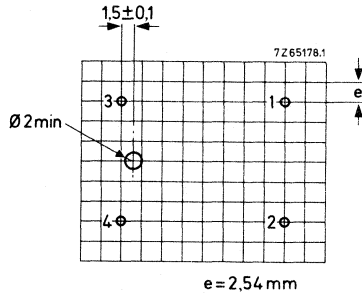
Hole pattern for mounting on a printed-wiring board, hole diameter $1,3 + 0,1$ mm.
